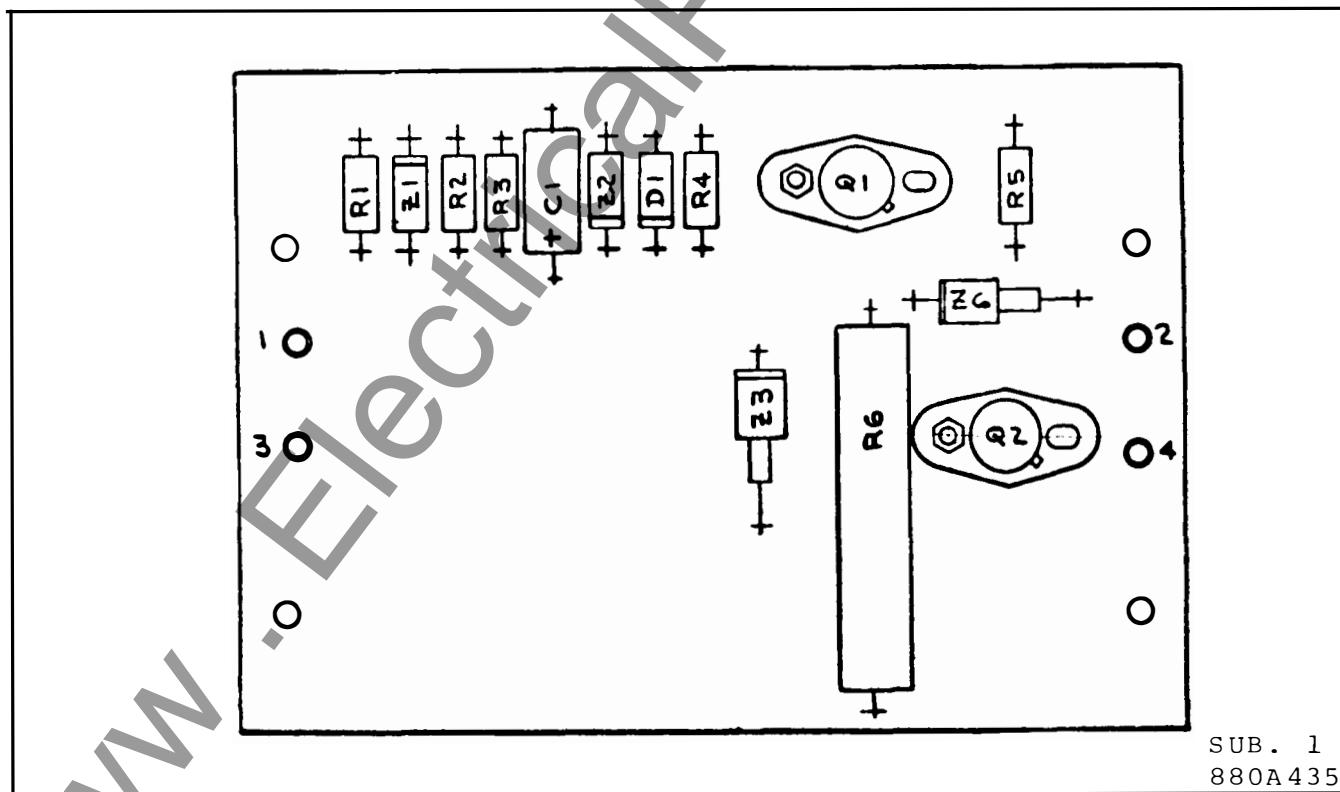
Component Location Single Input Buffer in FT-11 Case 125 VDC.
